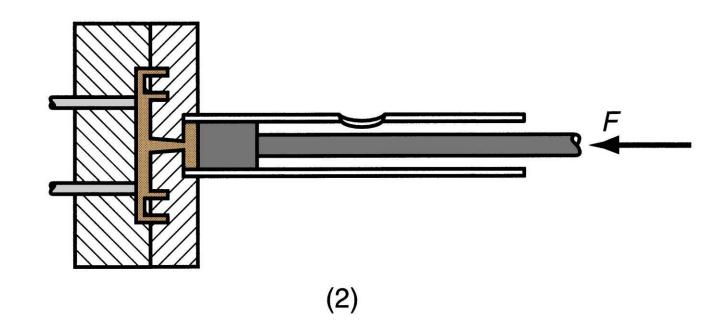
Cycle in cold-chamber casting: (2) ram forces metal to flow into die, maintaining pressure during cooling and solidification.
